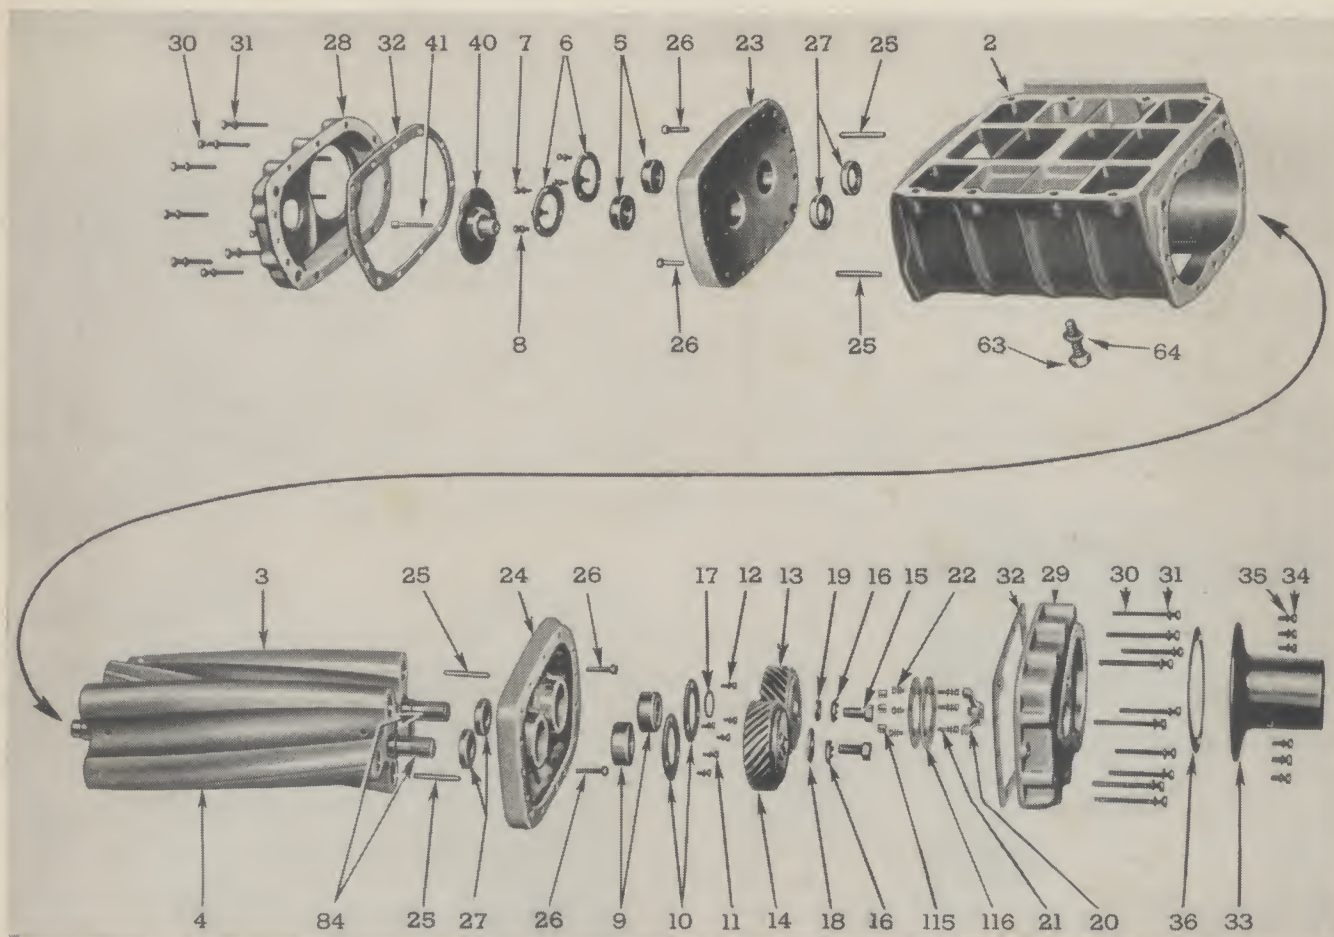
B—GM engine blower details and relative location of components. Shims (17) control rotor clearances (timing).
